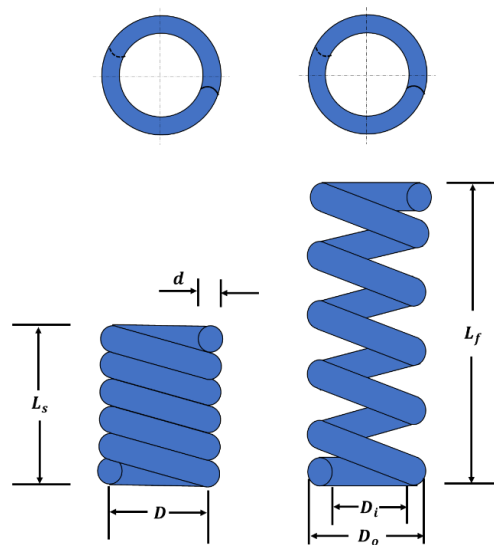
Dimensional Parameter of Helical Compression Spring.
